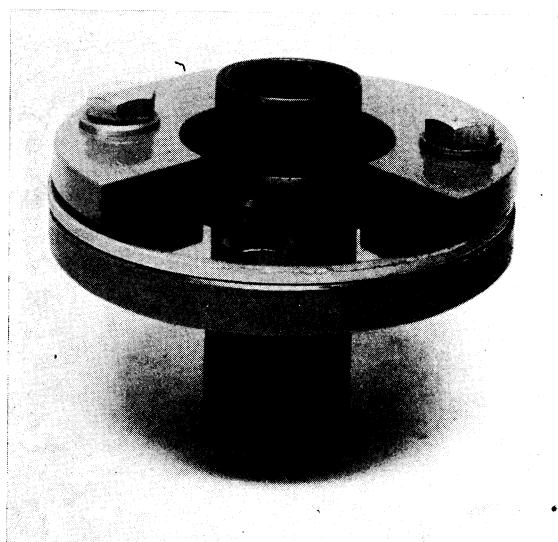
Spacer seal (*Courtesy of Heraeus⁵⁴²*)
